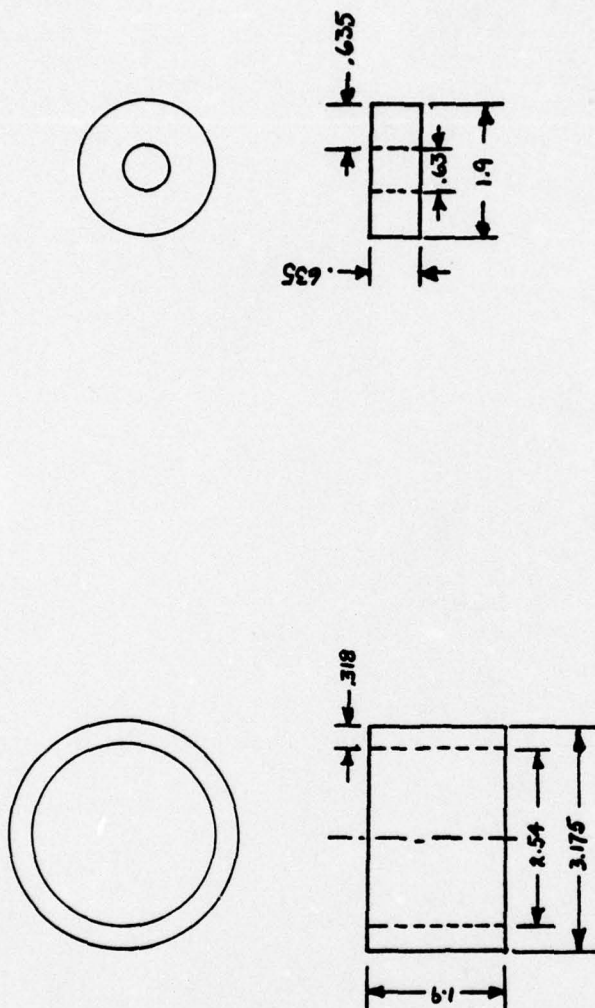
TRANSDUCER ASSEMBLY HOUSING
